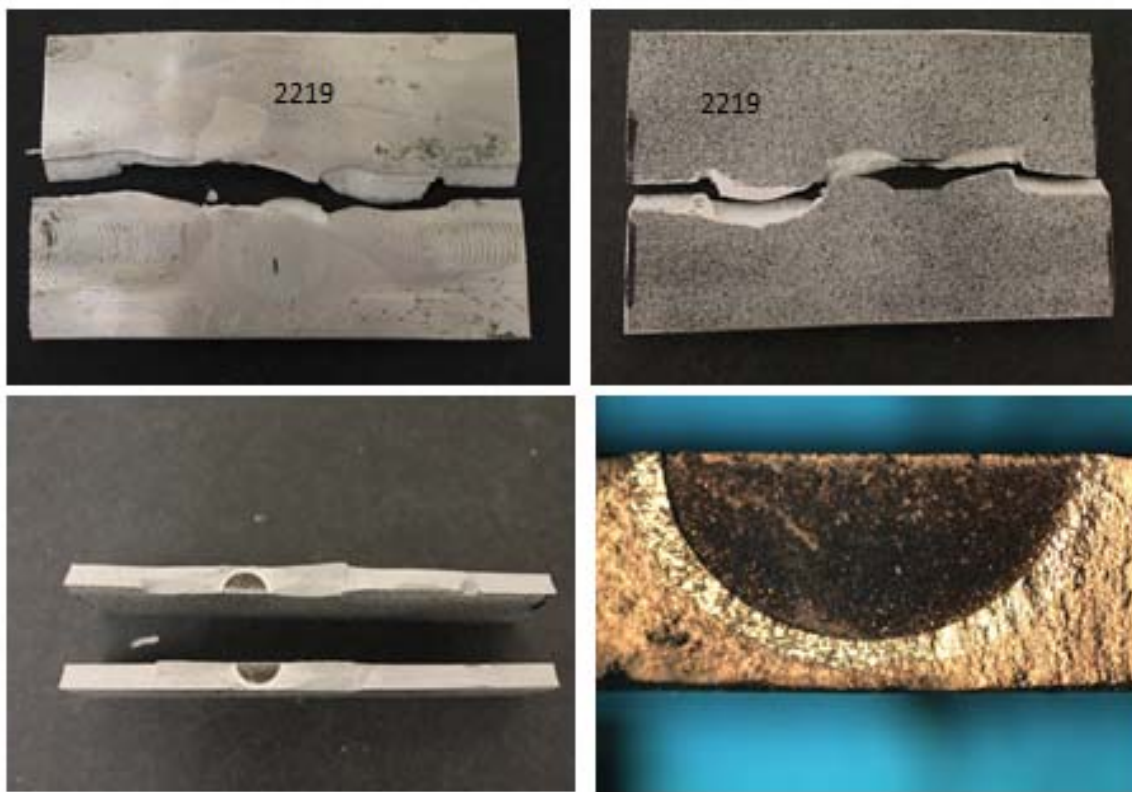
Sample CX05-P1: Top Left - the minor diameter side of the specimen; Top Right - the major diameter side with speckle pattern; Lower Left – pre-cracked flaw and fracture surface across part of the sample; Lower Right – close up of EDM notch and pre-cracked flaw.
